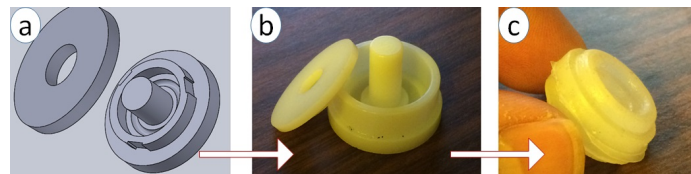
(a) The mold for joints was designed in SOLIDWORKS. (b) The mold was fabricated with a 3D printer. (c) The Ecoflex was poured in 3D-printed mold and cured at the room temperature.
